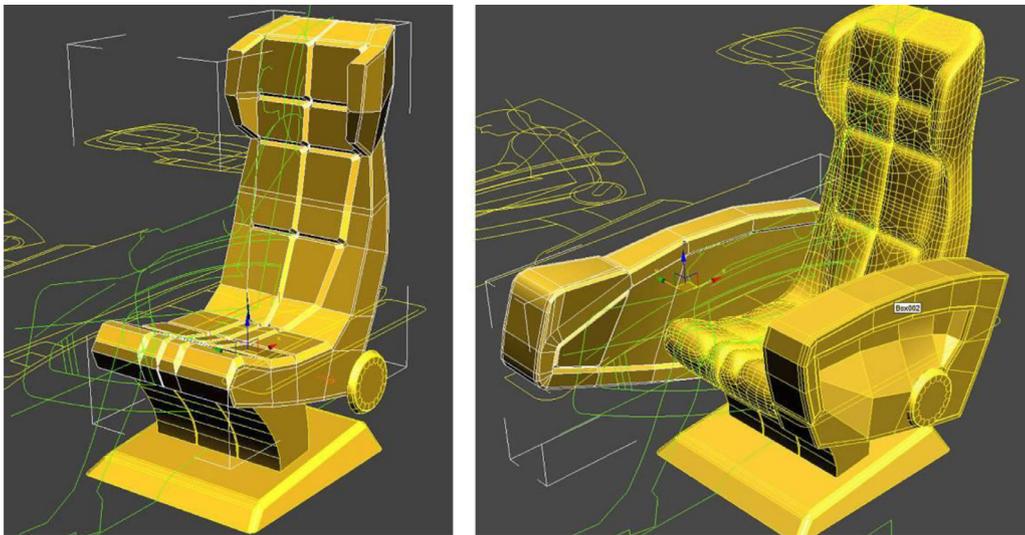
Primary faceted model and final assembly of the passenger seat.
